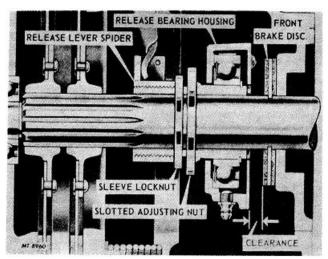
Release Bearing Adjustment (Lipe LP Clutch) (Manual Adjustment Type)
